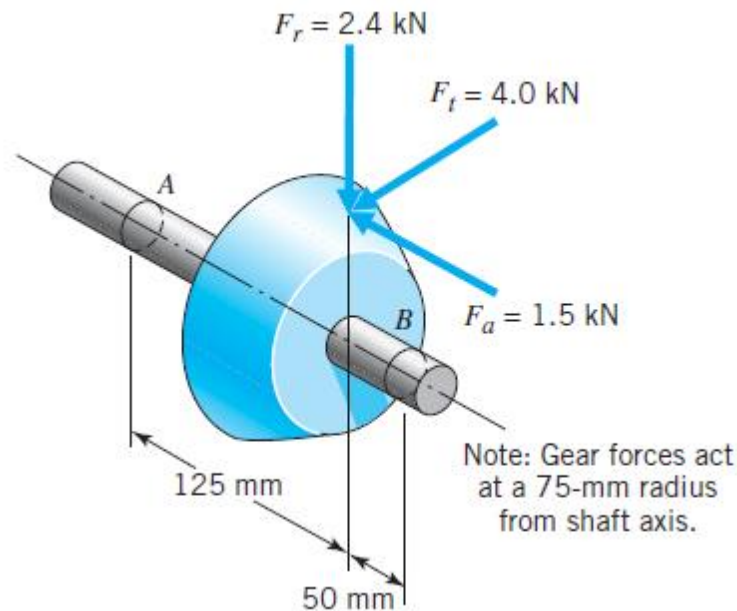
Bevel pinion and shaft (ref: Fundamentals of Machine Component Design, 5th Edition, Wiley.)
